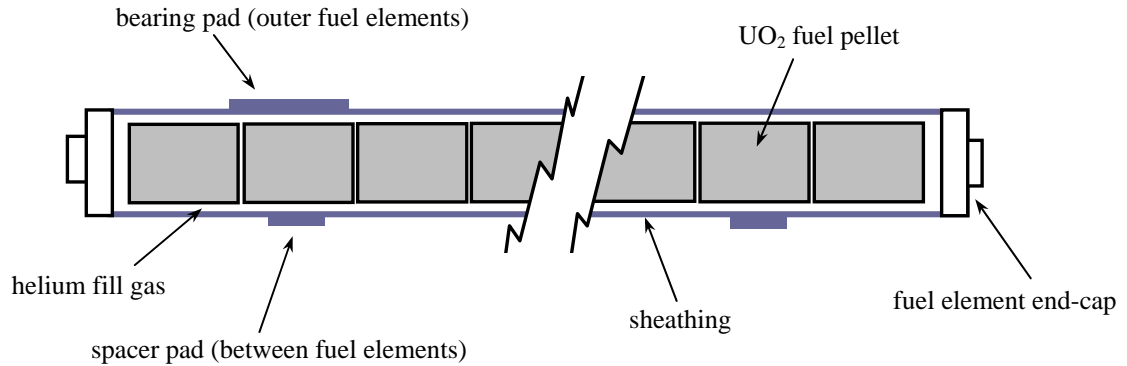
Axial cross section of a CANDU fuel element. Dimensions are not to scale.
